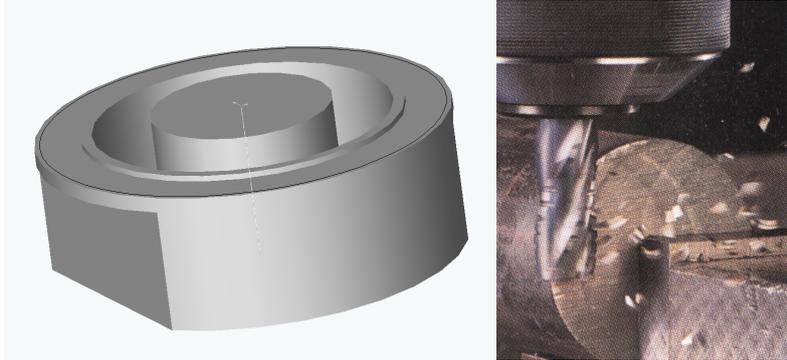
Stage 5: Removing the workpiece and milling the outer geometry.
